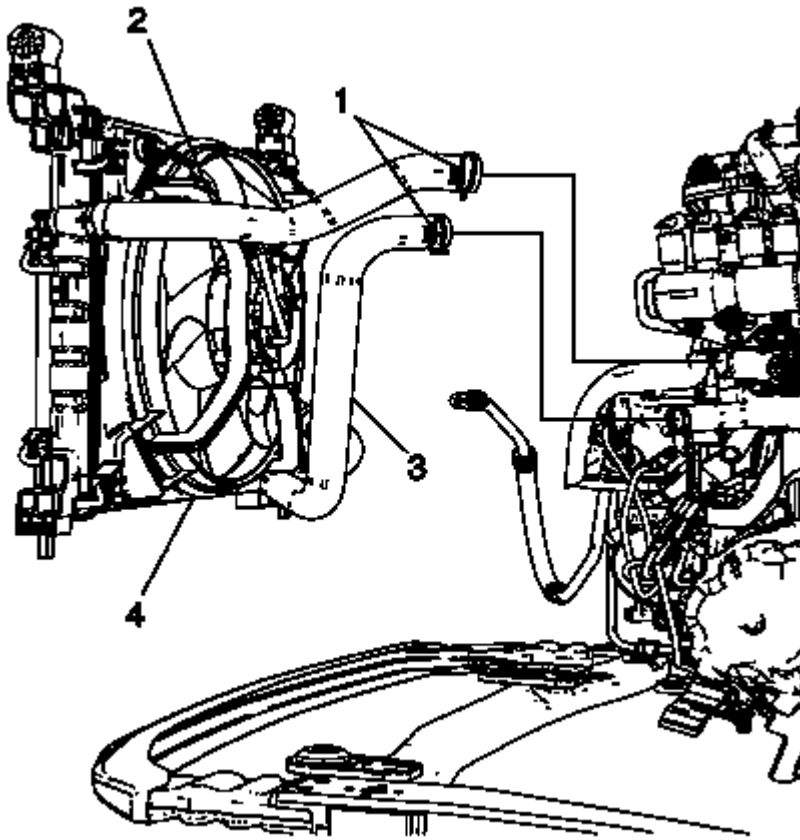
Radiator Inlet And Outlet Hose Clamp
